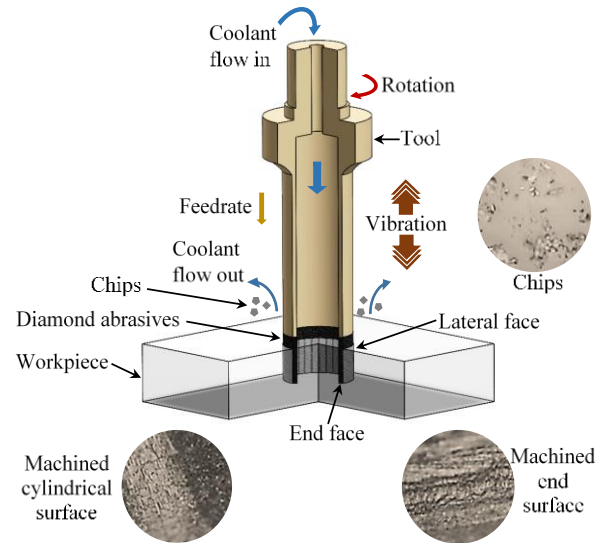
Illustrations of Rotary ultrasonic machining (RUM) and microscopic pictures of machined surface, cutting interface, and cutting chips of K9 glass
